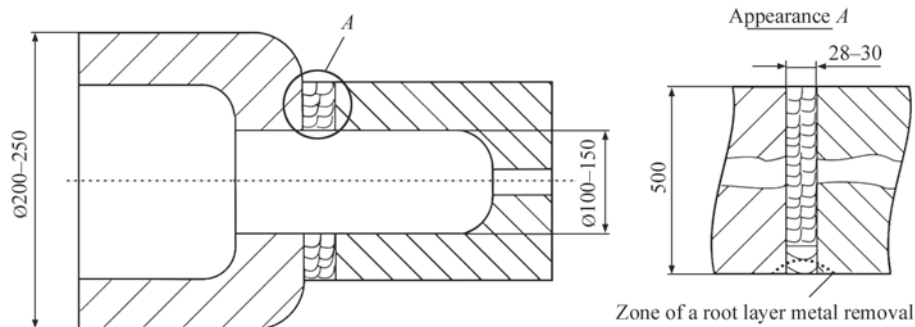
Scheme of a welded hydraulic press cylinder
